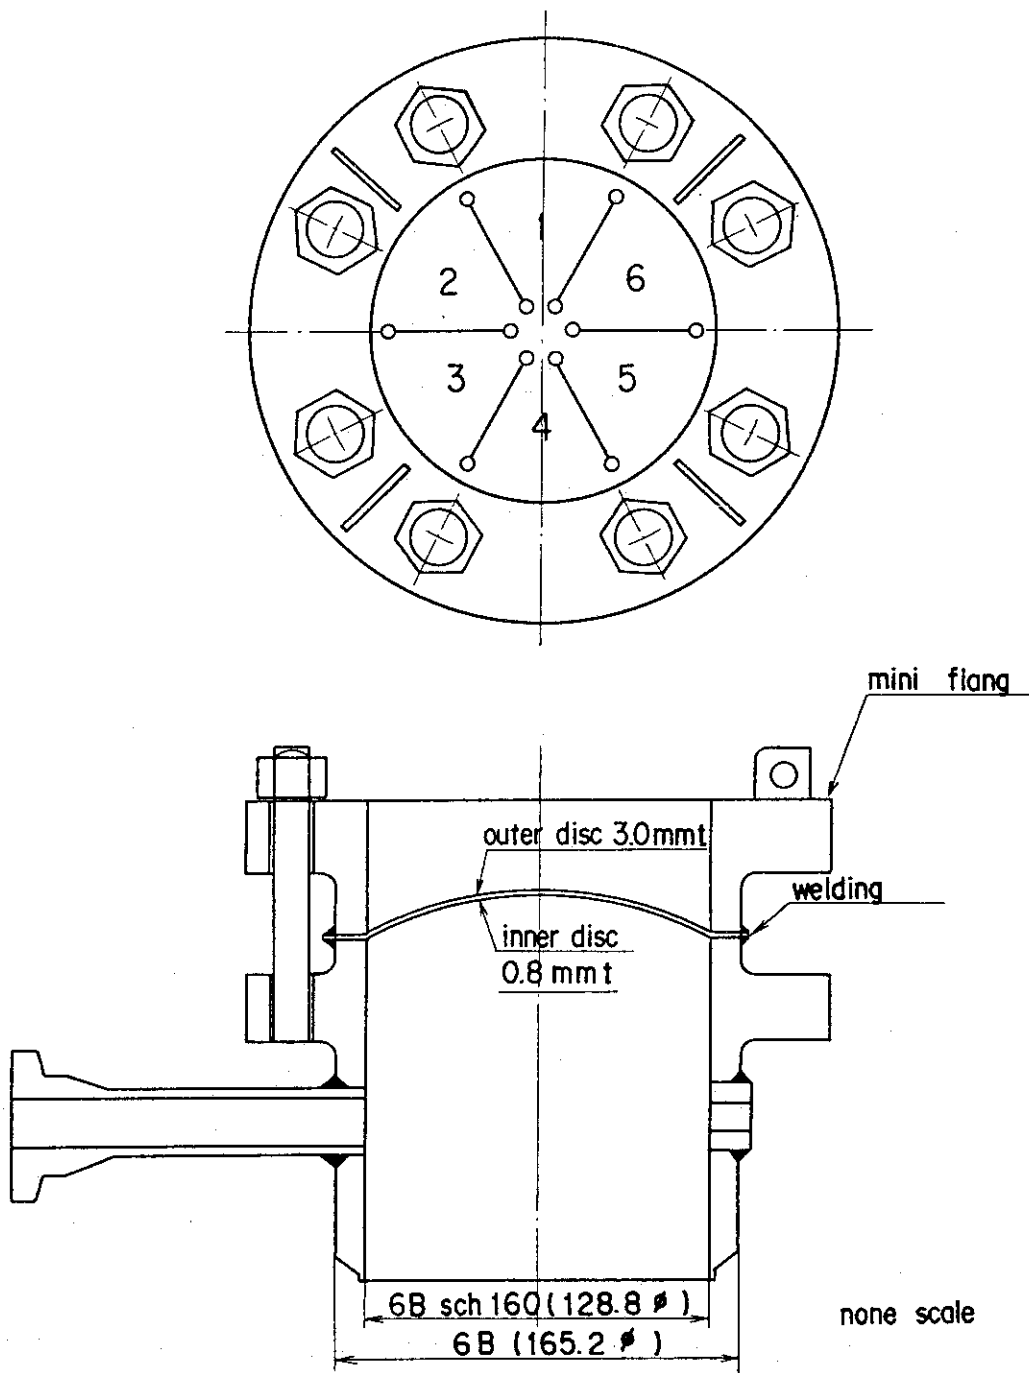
Rapture disc assembly for using 6B·PWR pipe whip test (5702·5703)
